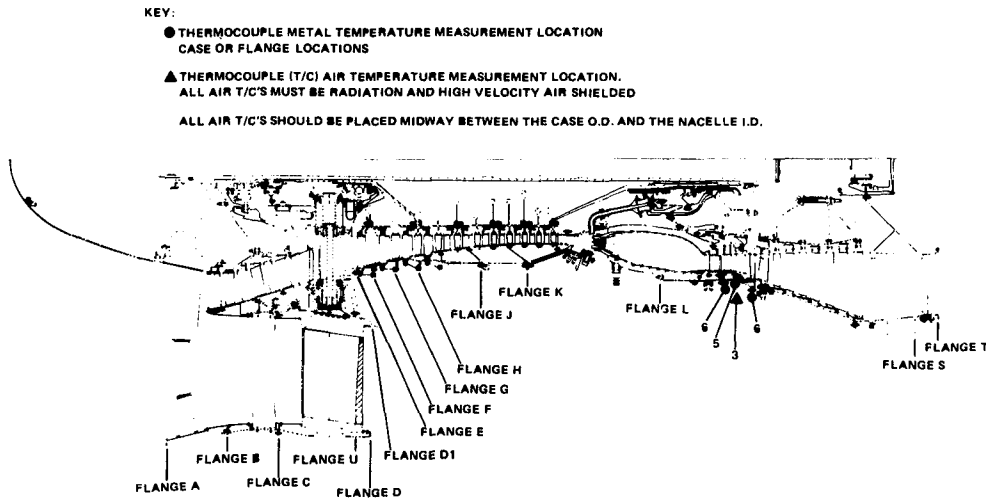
High-Pressure Turbine Case Thermocouple Locations - 18 thermocouples were installed around the front and rear flanges of the turbine case and two were located in the air space above and below the case. (J21627-26)
